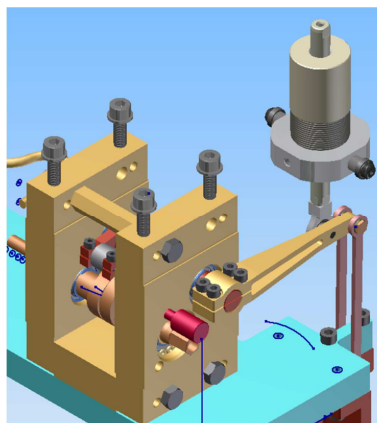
CAD Design of spring assisted demonstrator with linear magnetic spring
